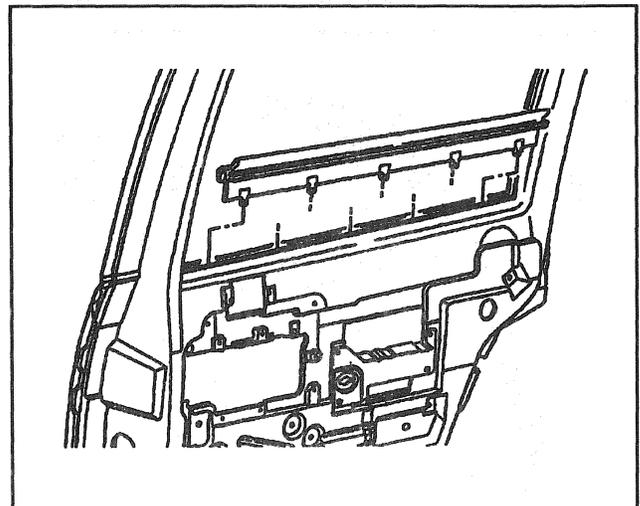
Rear Door Outer Belt Door Window Outer Seal
